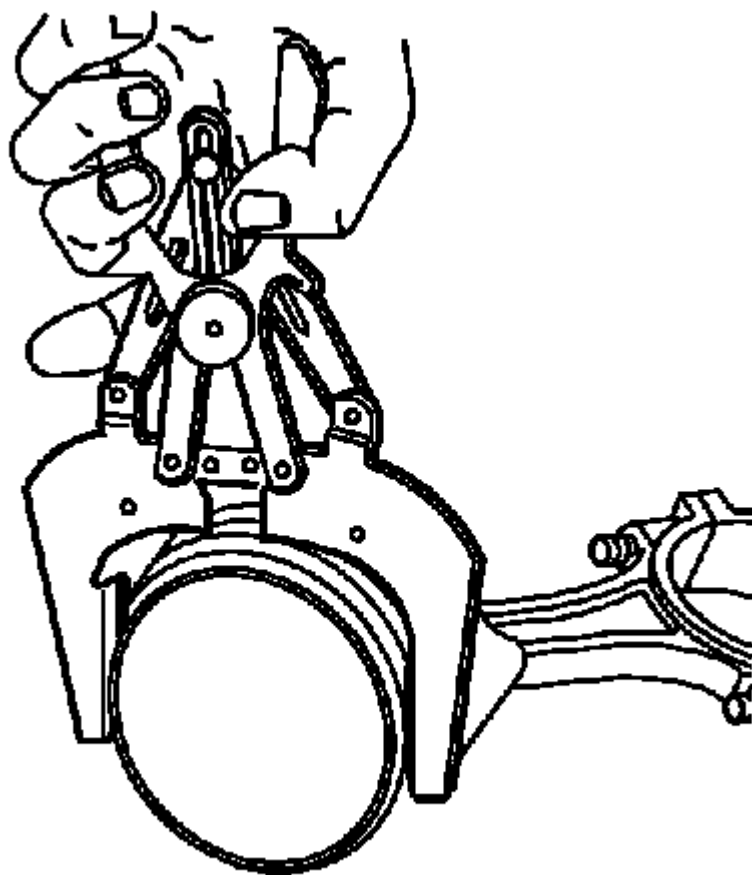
Cleaning The Piston Ring Grooves With Suitable Ring Groove Cleaning Tool
